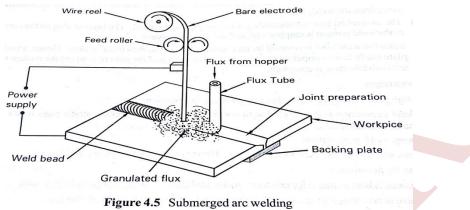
Submerge Arc Welding (SAW)
